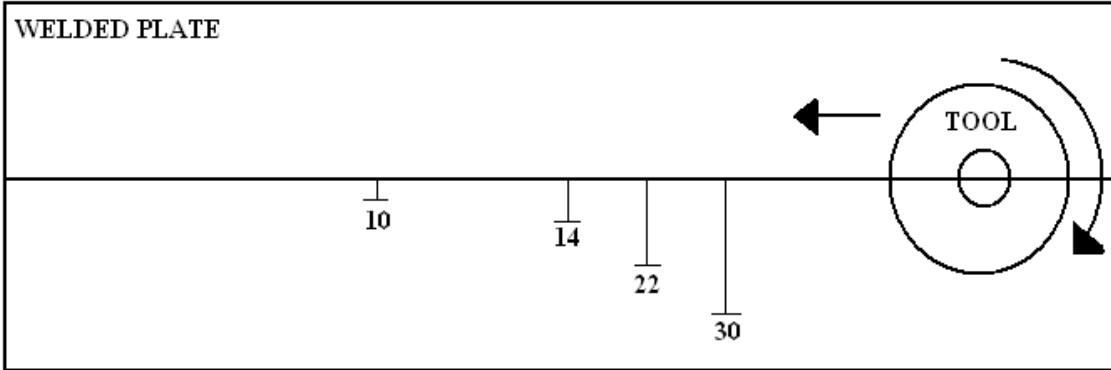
C.M. Chen and R. Kovacevic's thermocouple positions. Dimensions in mm.
